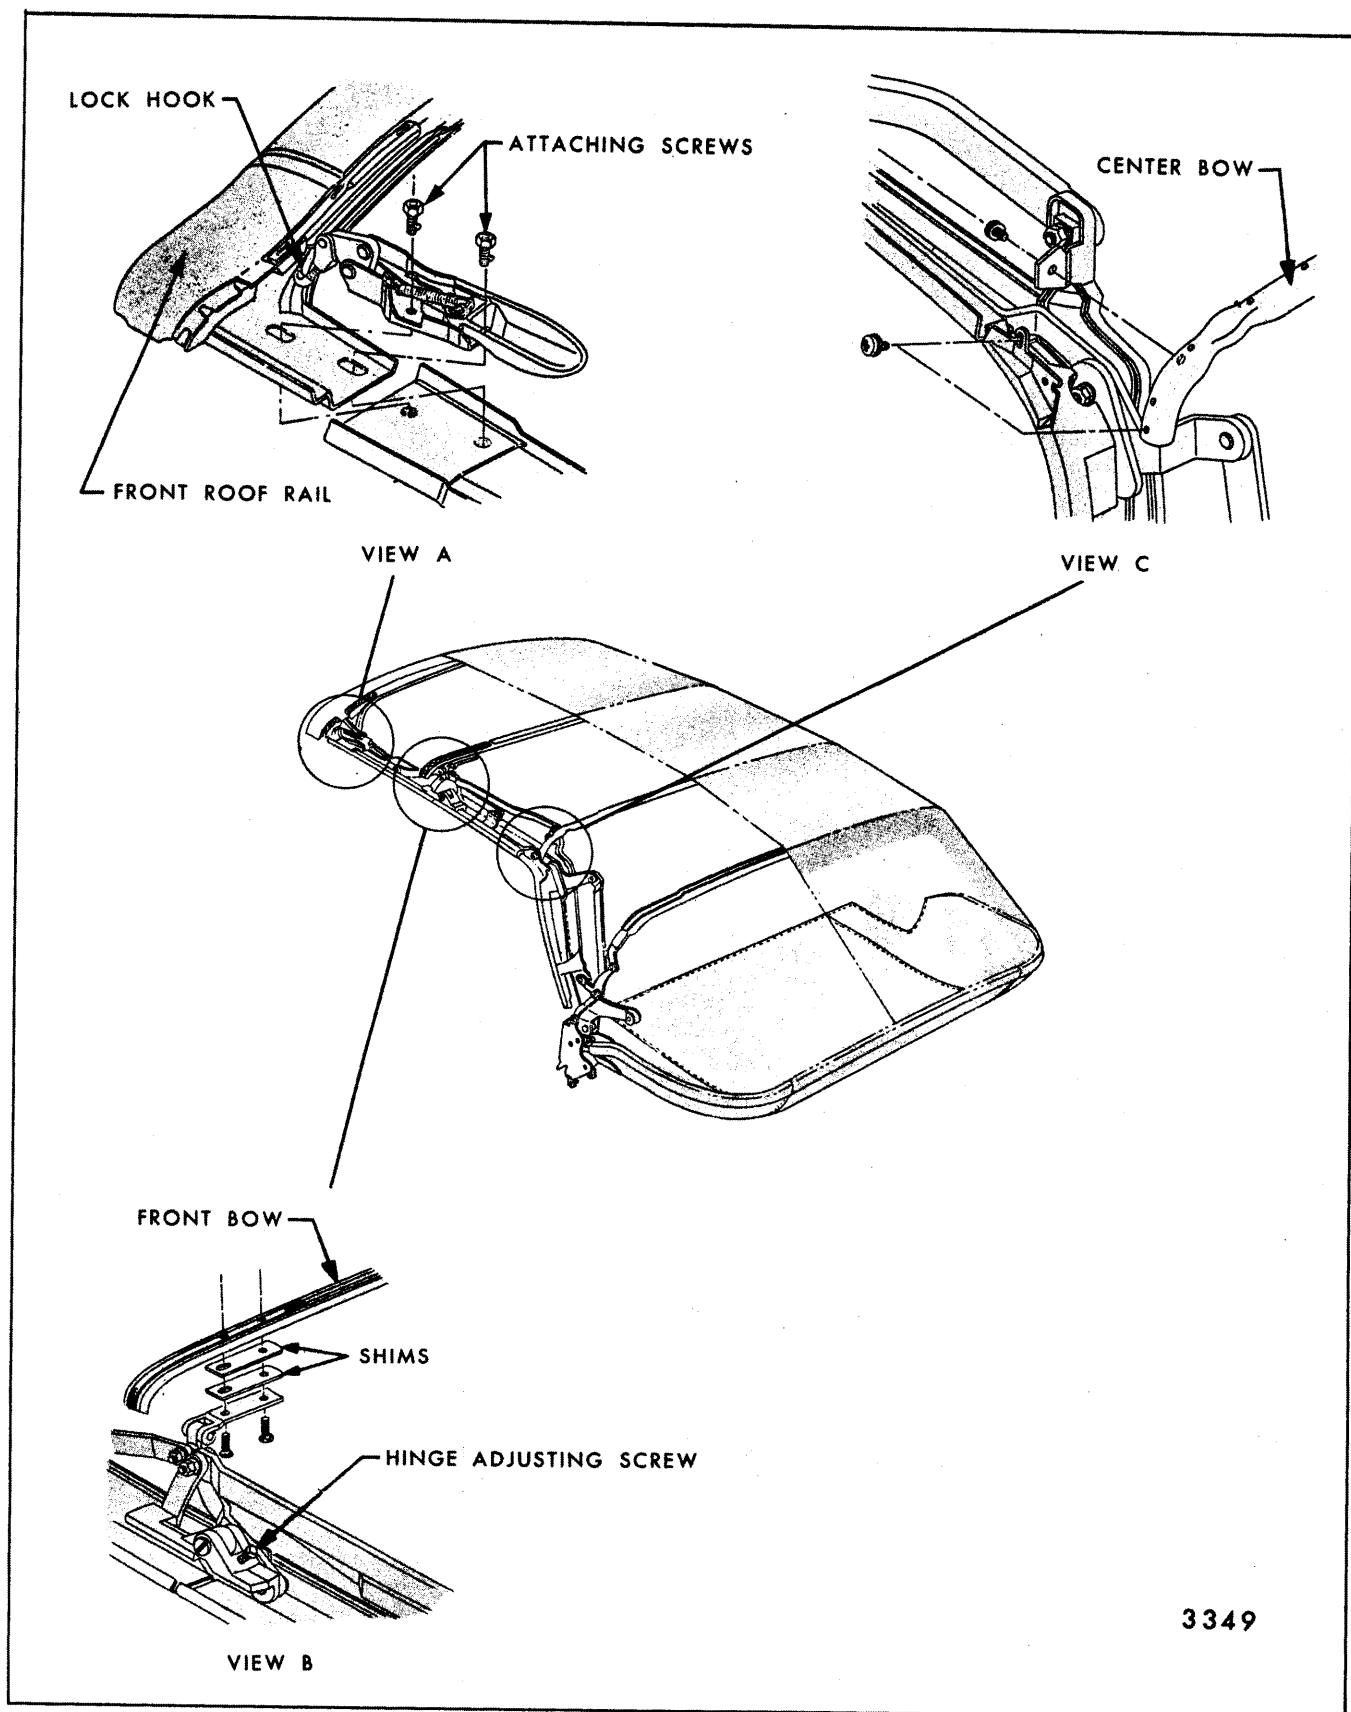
Folding Top Adjustments - "B & C" Styles Shown. "A" Styles Similar
